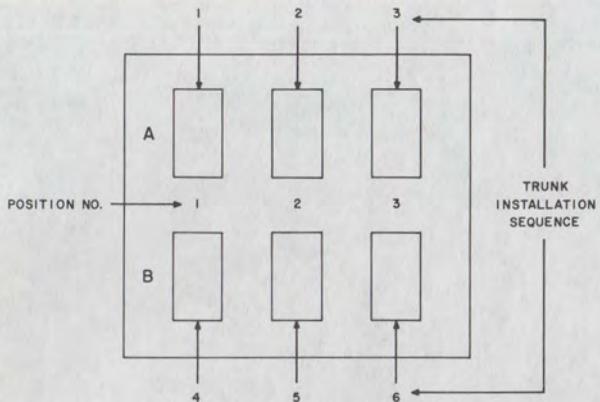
Connector and Trunk Arrangement in 606A Panel
